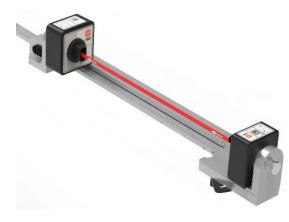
A-703SP-LM Surface-Plate Mounting Fixture
